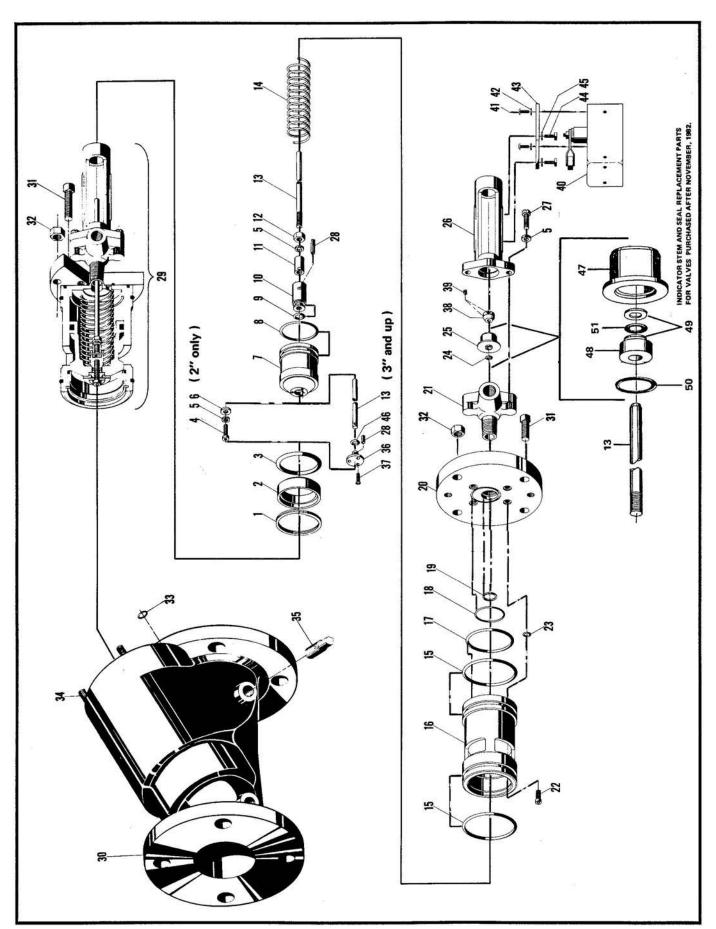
Parts Drawing - Series 700A Control Valves With Position Indicator
